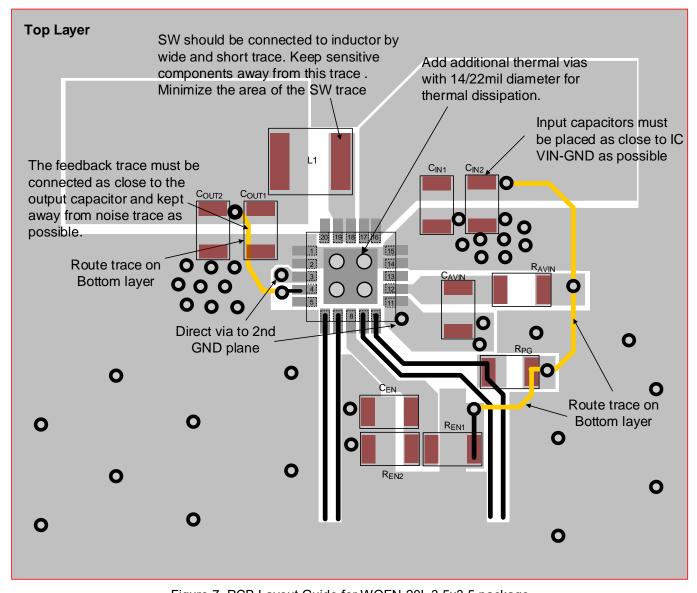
PCB Layout Guide for WQFN-20L 3.5x3.5 package
